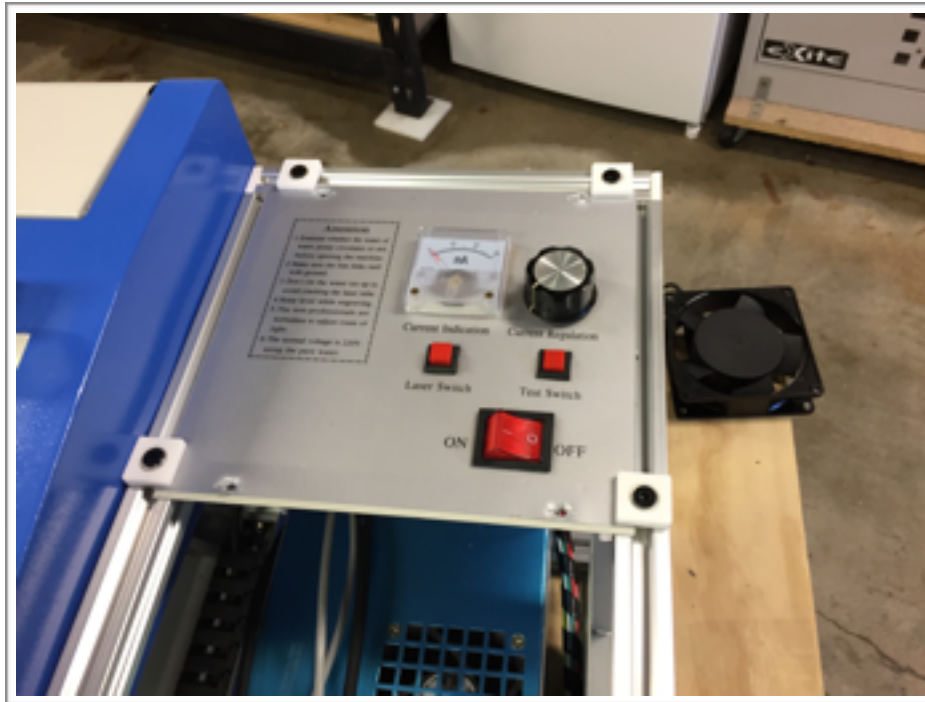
here is the cable guide in place directing cables safely between the cabinet and control box.
